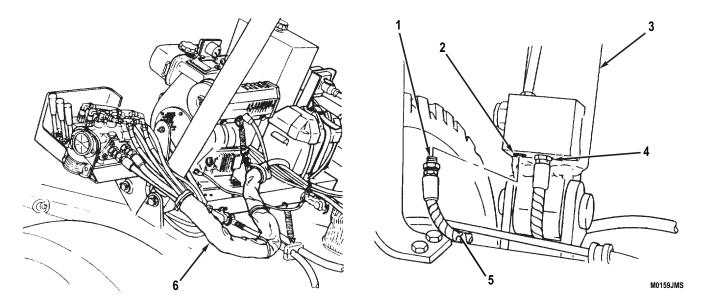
Hydraulic Control Valve-to-Hydraulic Lift Cylinder Hose Assemblies Removal.
